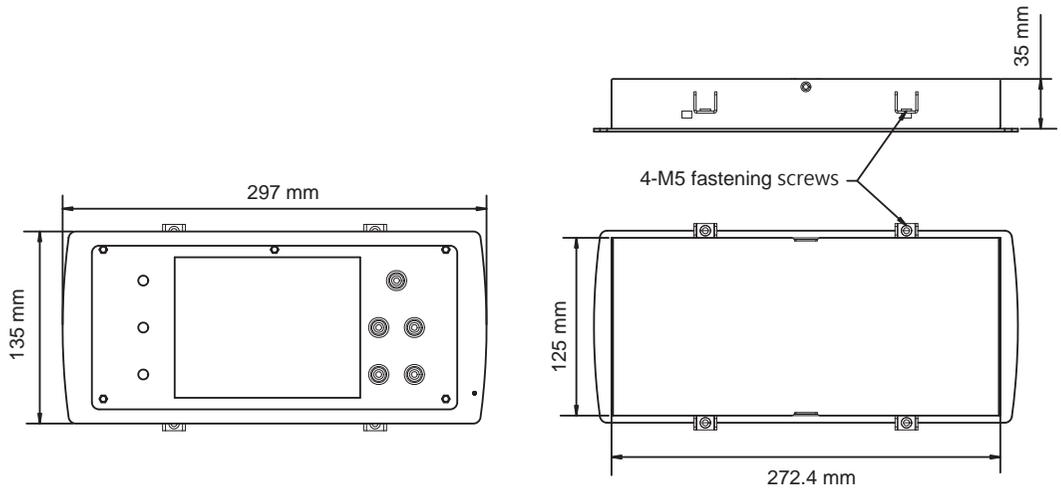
External View of the Fixed-type SVG Module)
